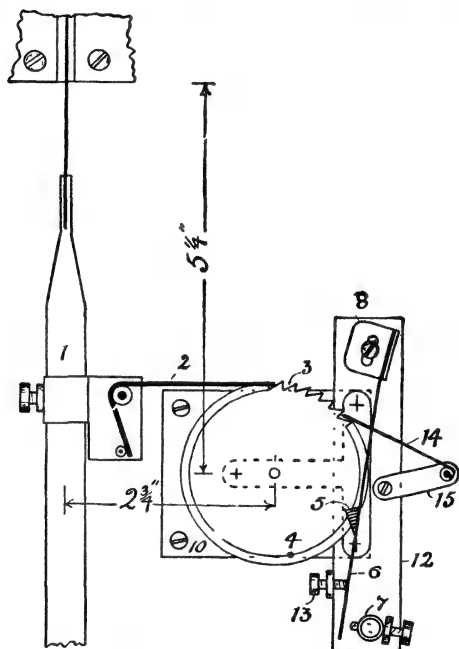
Front View of Transmitter and Pendulum Fitting (Incomplete)
